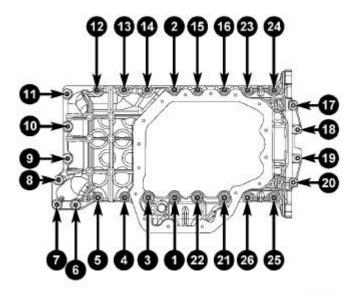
OIL SUMP TORQUE SEQUENCE Courtesy of CHRYSLER LLC
